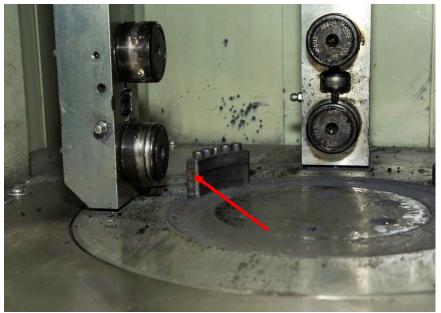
Dynamic Compactor - Mechanical stop on rotating drive
